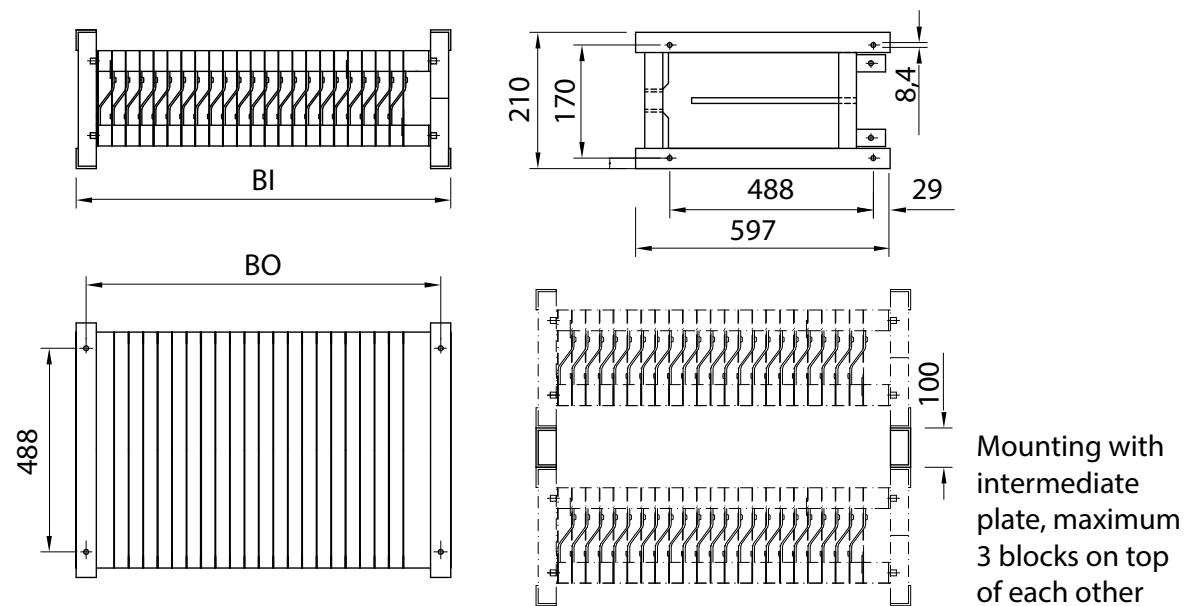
Resistor cabinet SWLFR (dimensions in mm, weight in kg)
